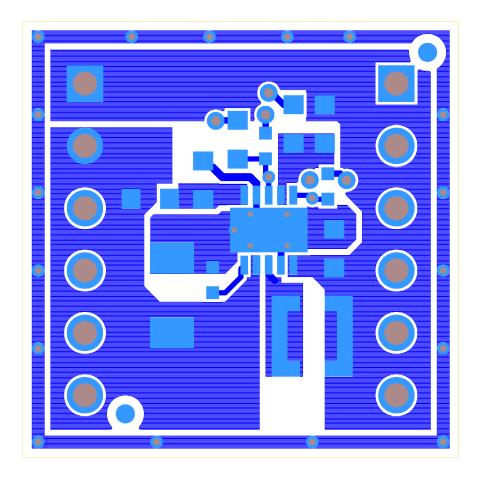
SMP-TPS61201-MVK Board Layer 1 – Top Side
